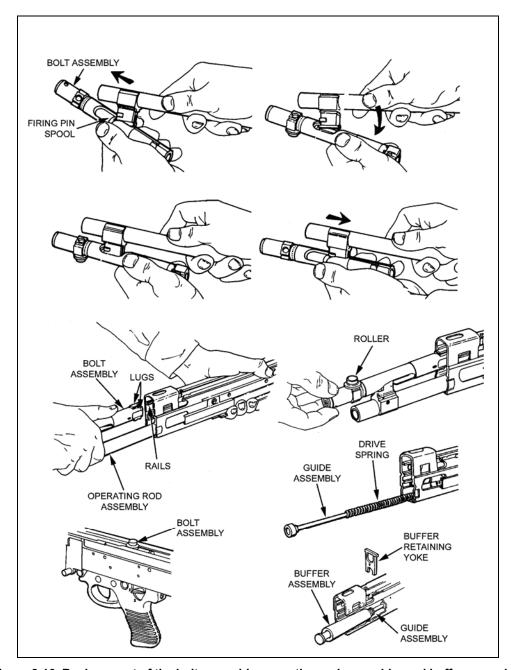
Replacement of the bolt assembly, operating rod assembly, and buffer assembly.
